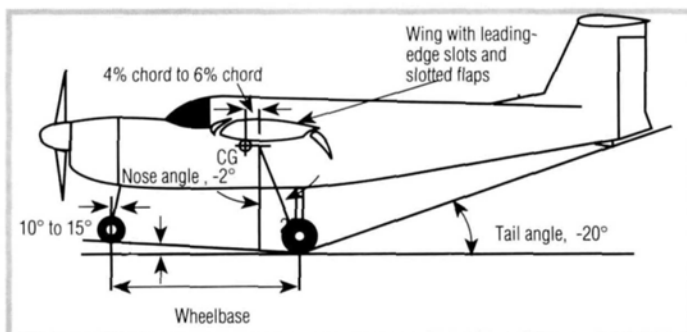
Fuselage upswEEP required to obtain a high tail angle and a short landing gear. This drawing shows the Crane, which was designed by the author.
